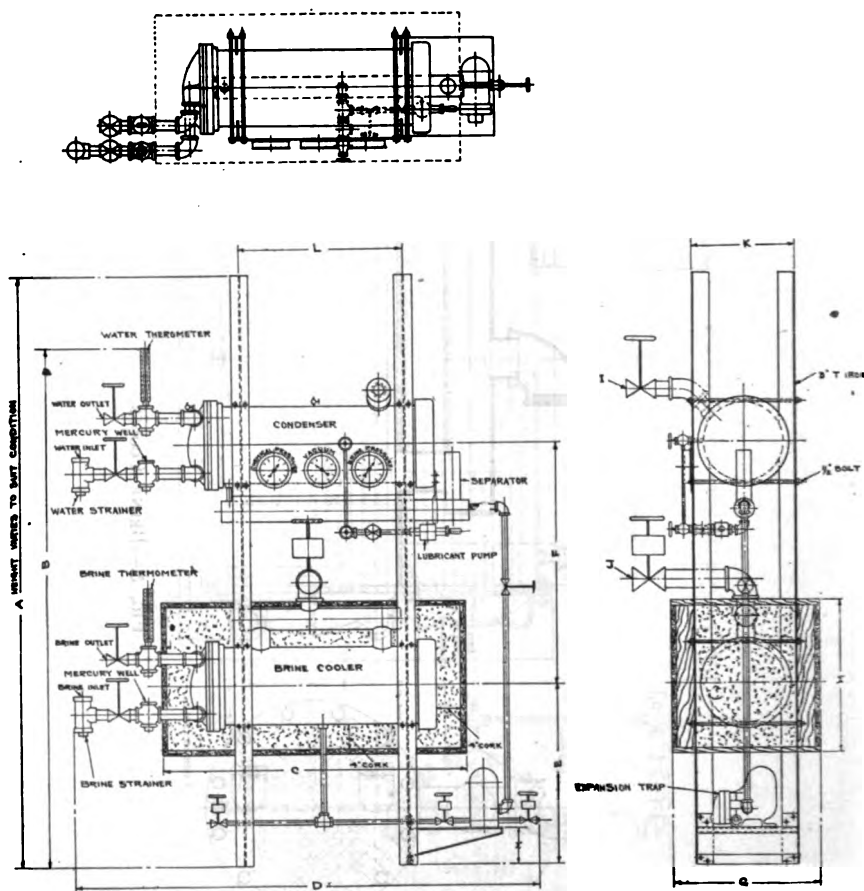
CONDENSER AND BRINE COOLER ASSEMBLY.
